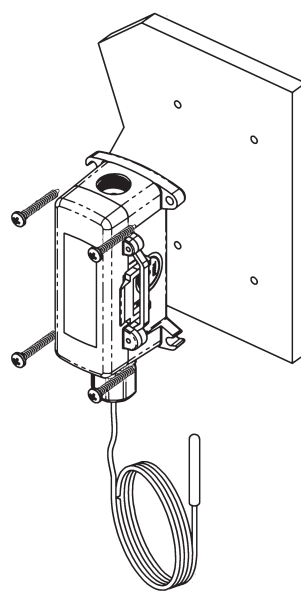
Mounting the BAPI-Box 2 (BB2) Enclosure
